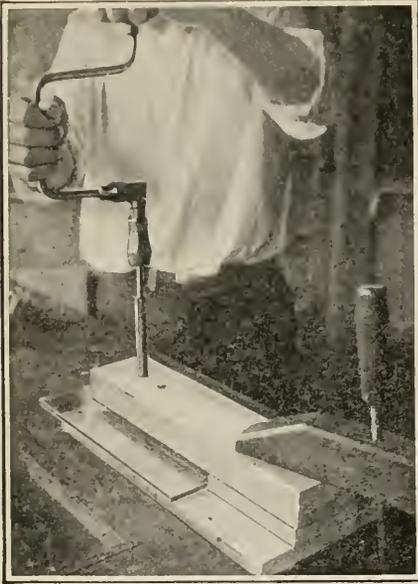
Grinding a hole in plate glass with a brass tube charged with abrasive powder.
